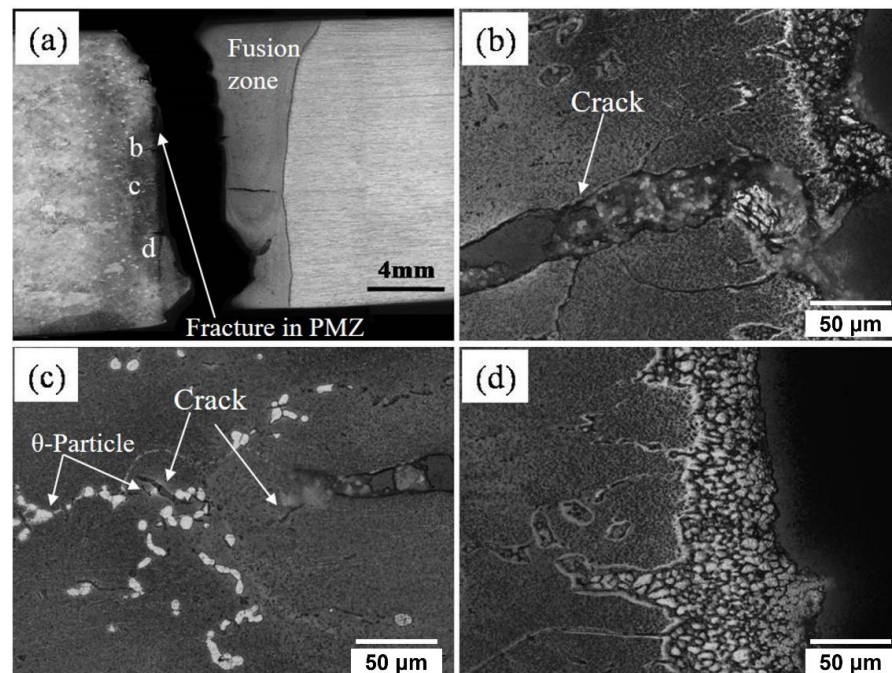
(a) Optical macrograph of a fractured tensile-test specimen of dissimilar EB weld; (b,c) microstructures of cracks existing near θ -particle fractured region in PMZ of AA 2219 side; (d) microstructure of crack propagated in FZ from PMZ.
